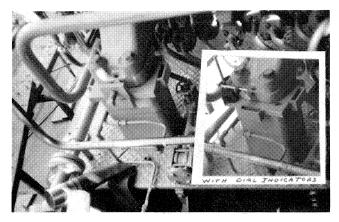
Alignment Bolts, X-Y-Z, for Compressor Aligning.
